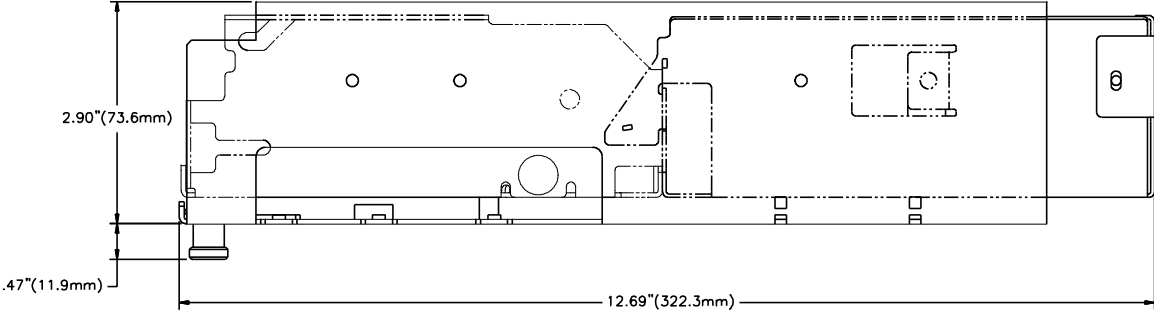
Model 750 Printer: Ticket Supply Box, & Drawer Chassis (62mm x 120mm)
